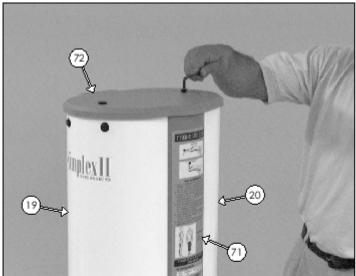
Attach the Plastic Shroud Lid (#72) to the Guide Rod Retainer (#7) using two Flat Head Socket Cap Screws 3/8-16 X 3 (#44).
